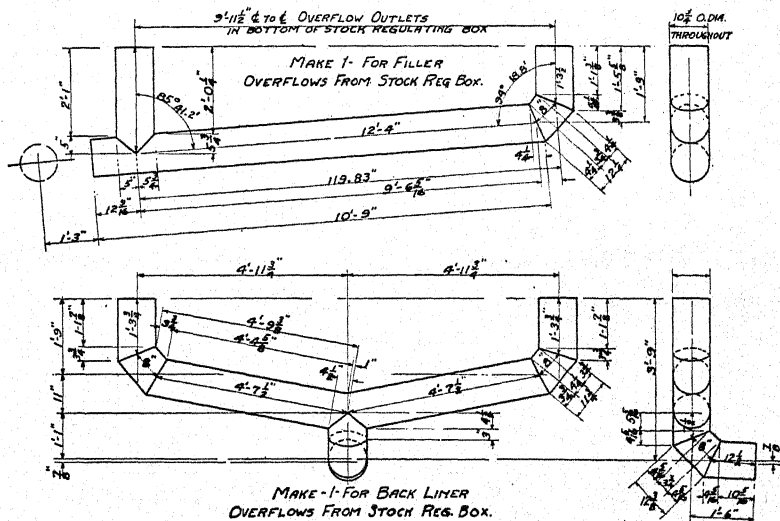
Working drawing of pipe fitting fabricated by arc welding.
